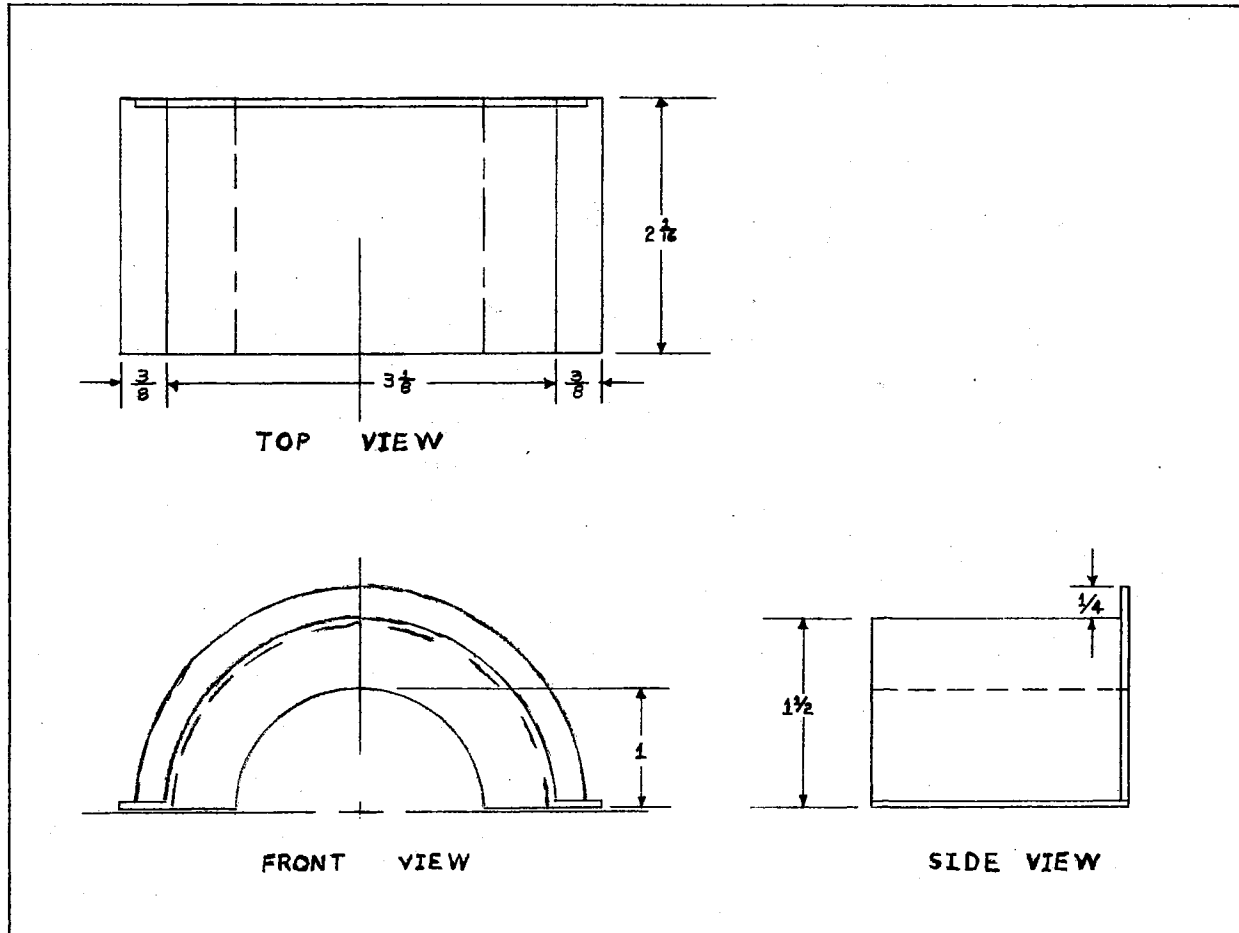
Detailed Dimensioned Drawing of the Protective Cover for the 2" OD Steel Tube
